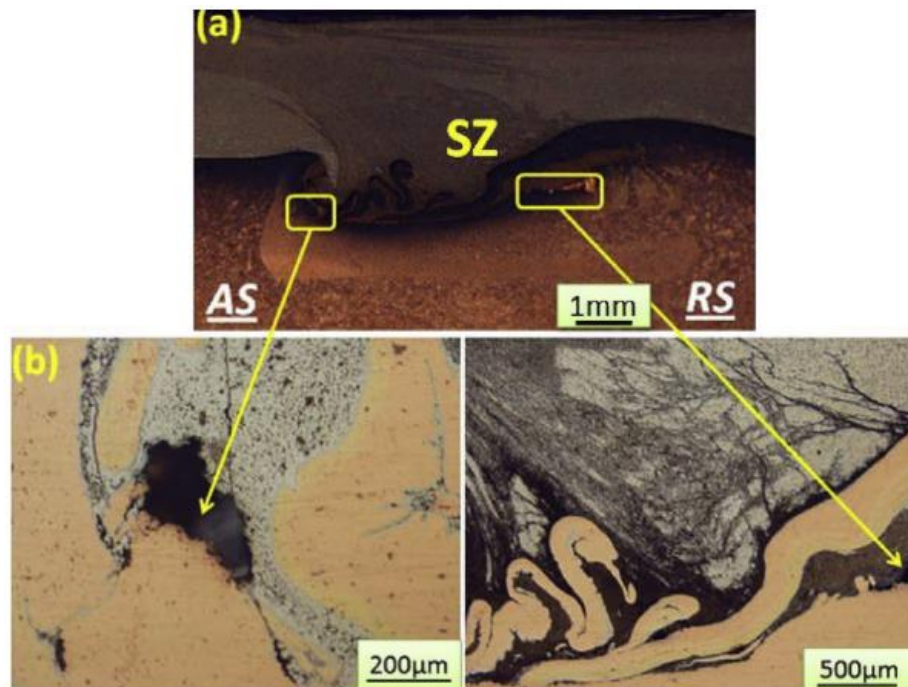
6 Weld interface produced using a ω of 1550 rpm and v of 15 mm/min [73].
